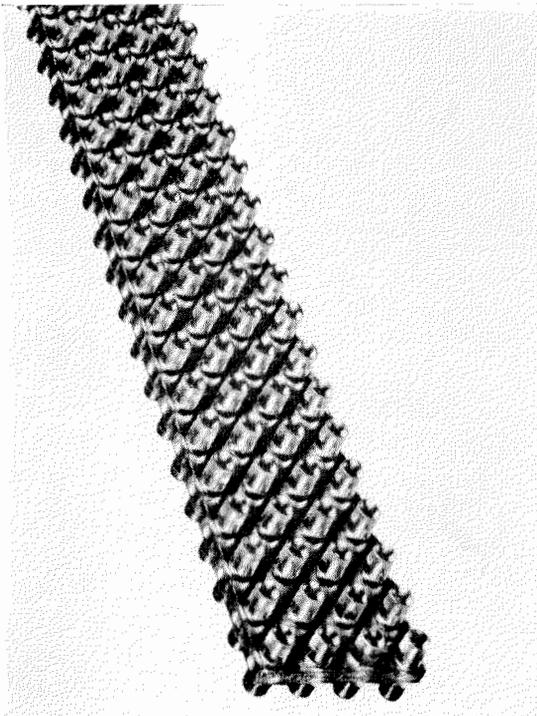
Molding with punched metal strips mounted on each surface to form a side plate.
